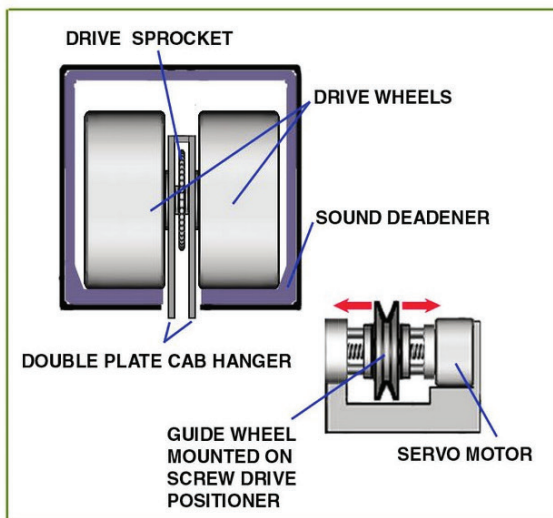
GUIDE WHEEL ASSEMBLY SHOWN DISCONNECTED FROM DOUBLE PLATE HANGER FOR CLARITY. THIS IS A CONCEPTUAL DRAWING ONLY, NOT TO SCALE AND WITH MOST PARTS REMOVED.
